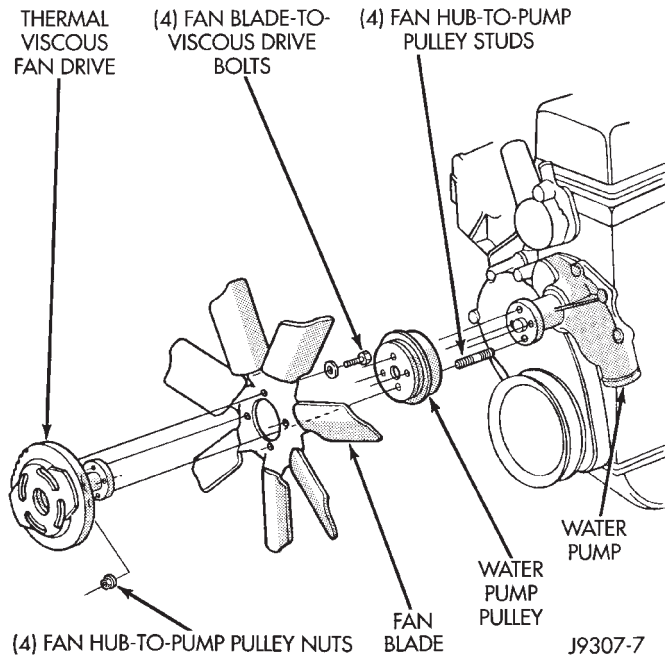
Fan Mounting Nuts—4.0L 6-Cyl.Engine
